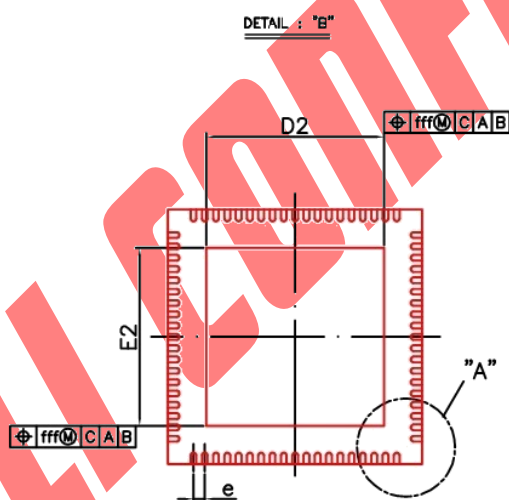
Mechanical Specification – Q7 (QFN 76L 9x9x0.85 mm) Package
